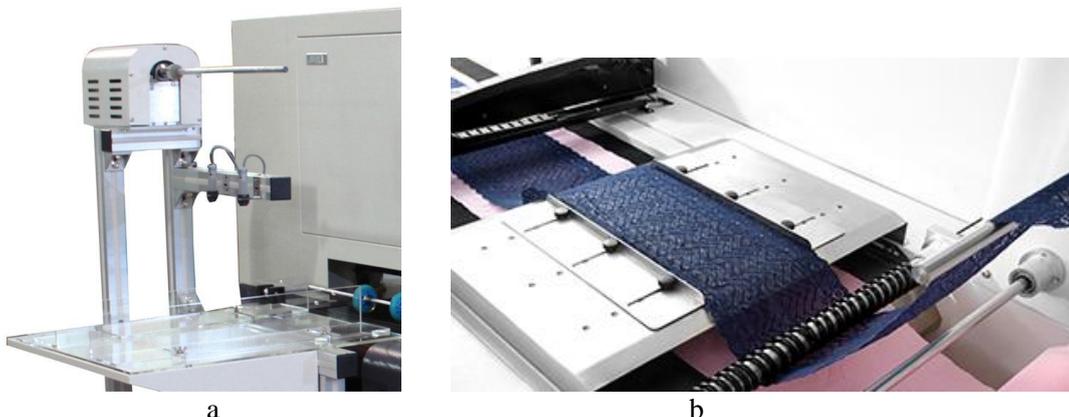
Lace feeding system of a laser cutting machine ETS-4012LF by Hunst (a) and MS series lace laser cutter by Gbos laser (b)
